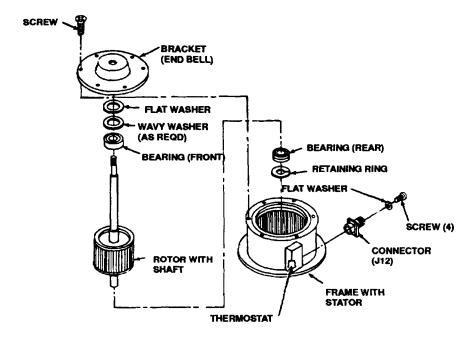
Evaporator and Condenser Fan Motor (IMC)
